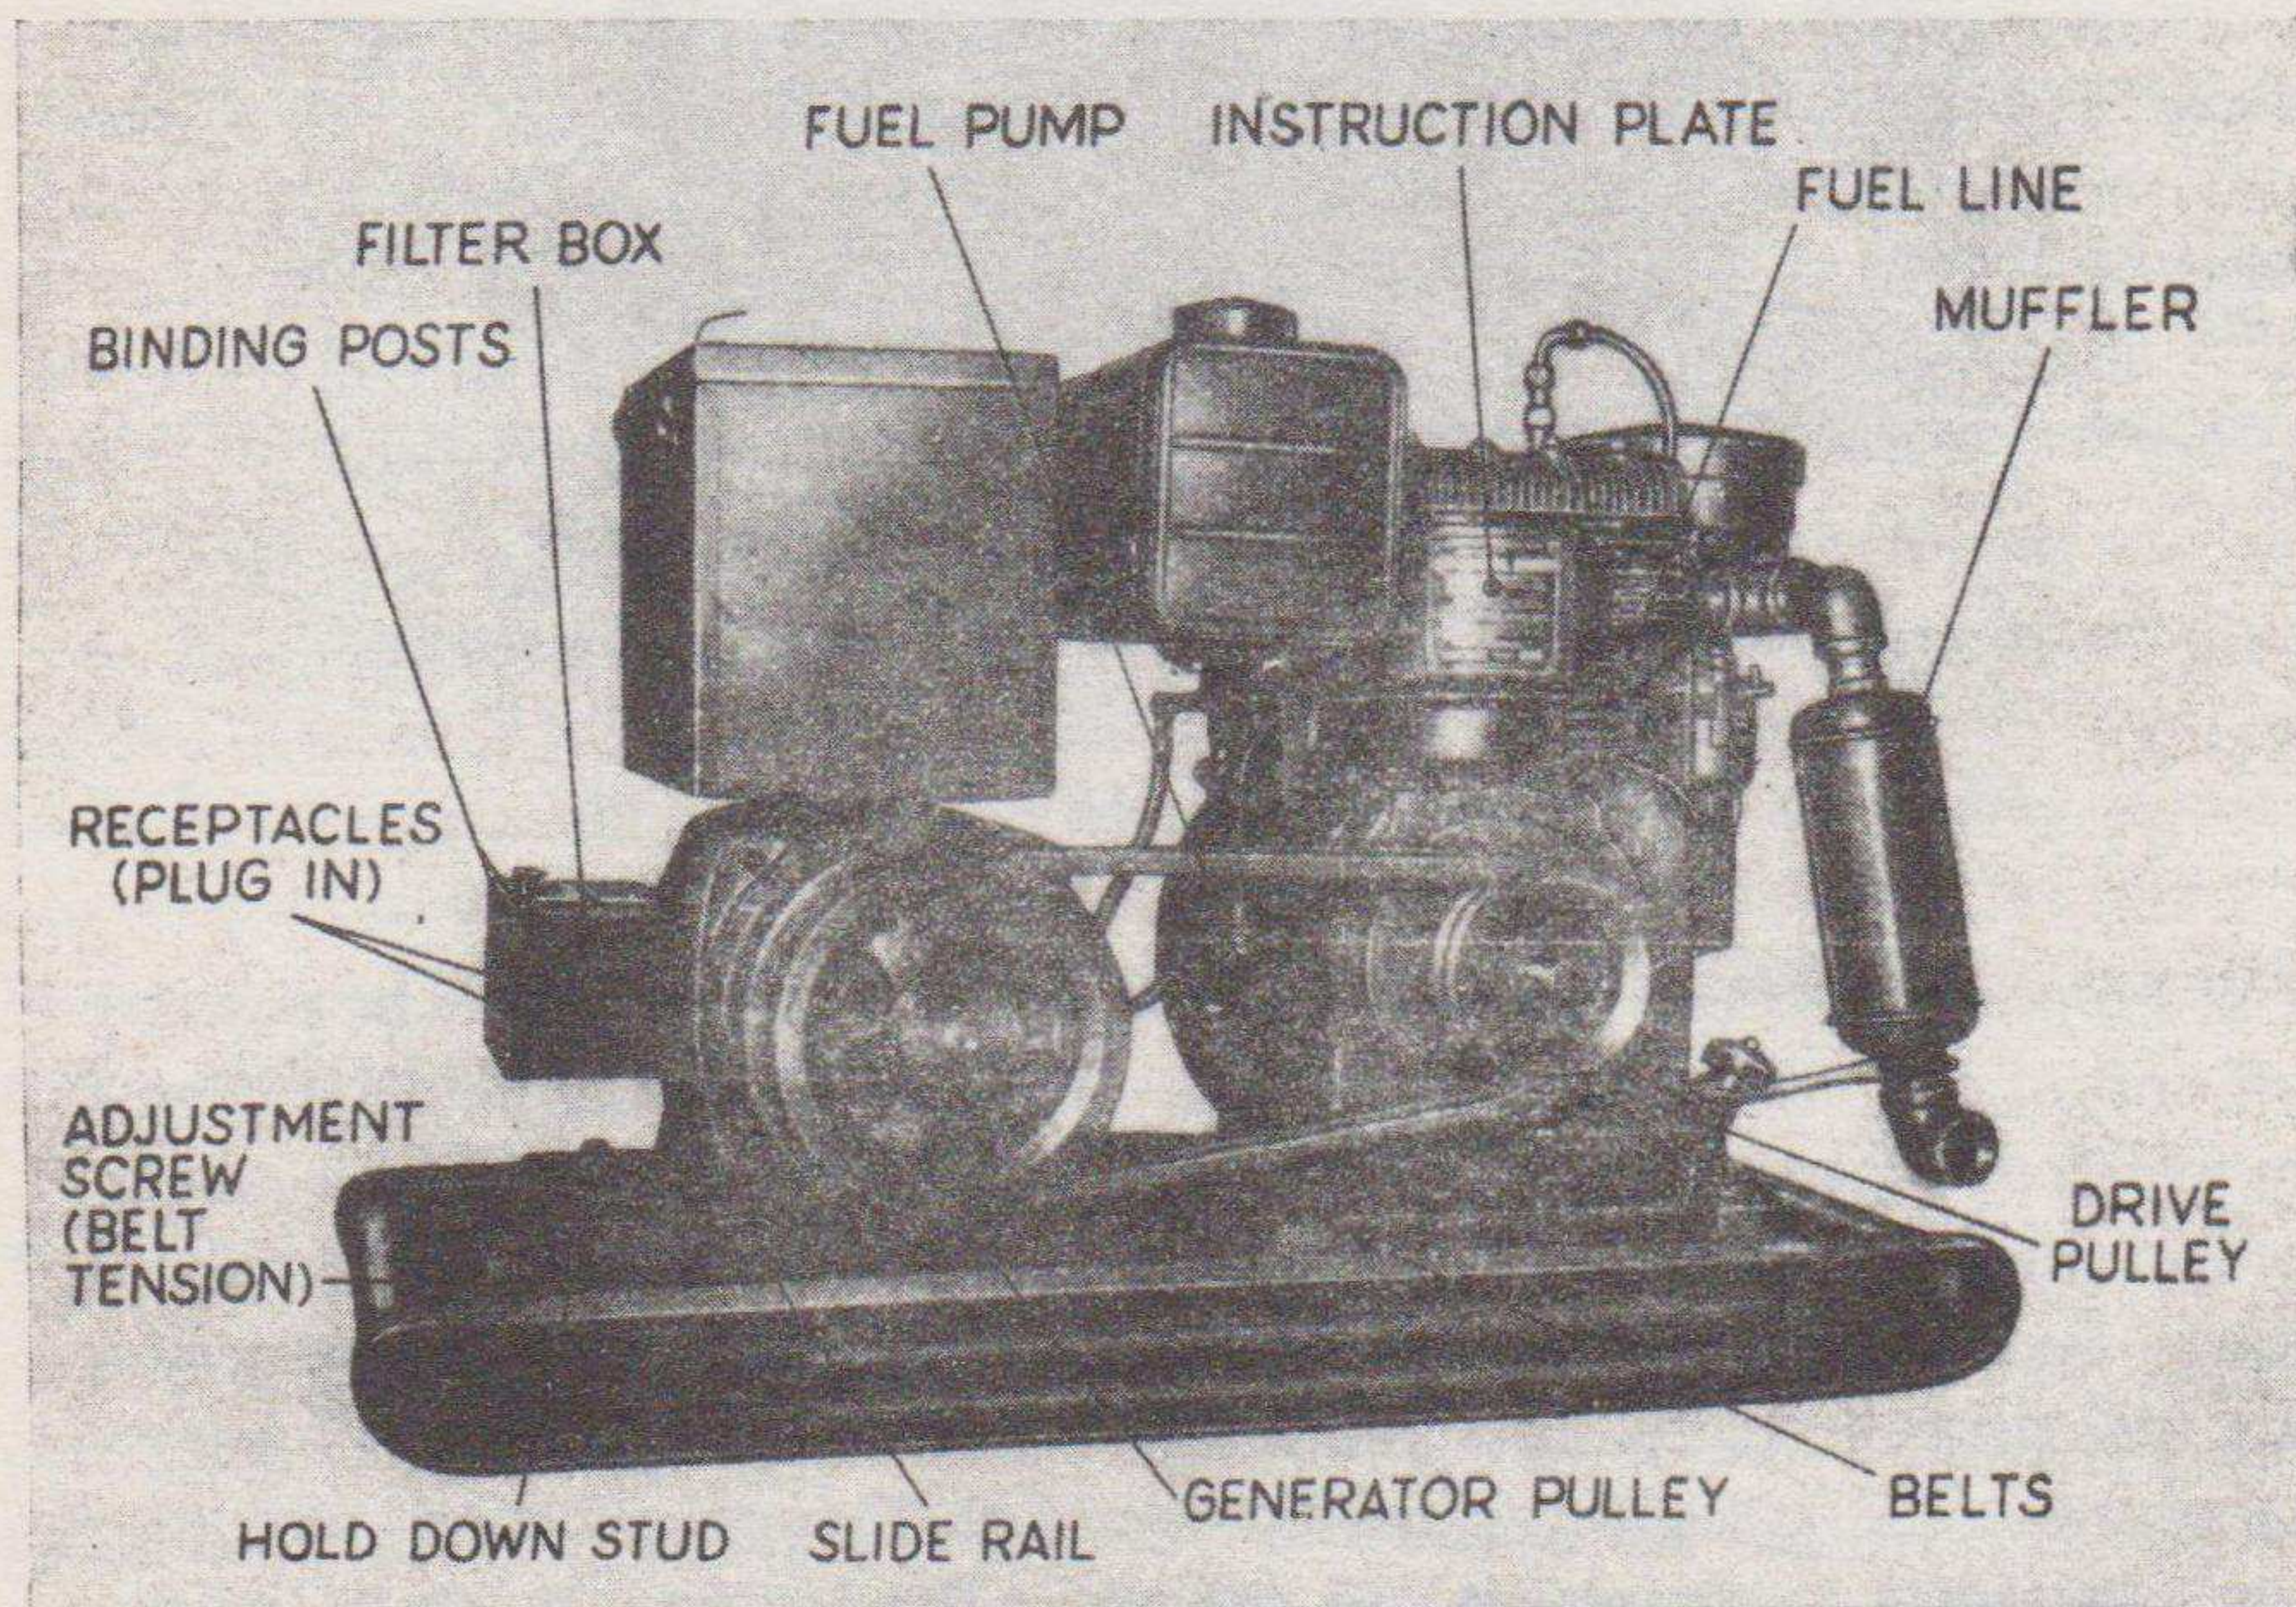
Power Unit PE-75-AF-GY, generator end, belt guard removed.
